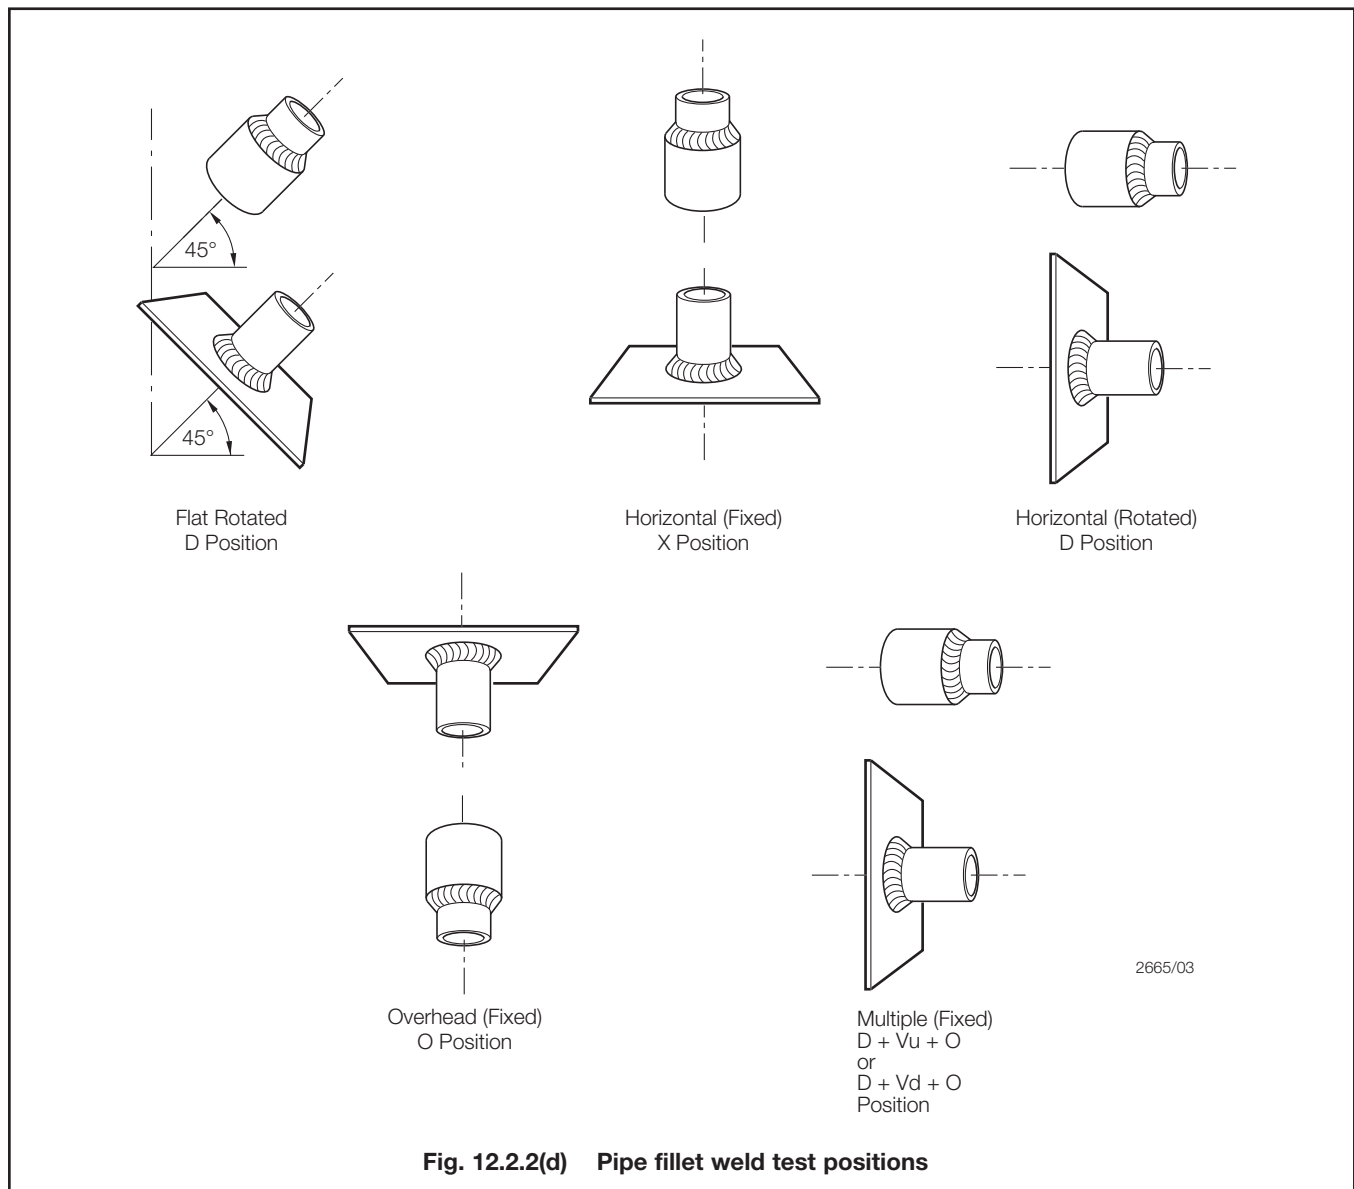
(d) Pipe fillet weld test positions
